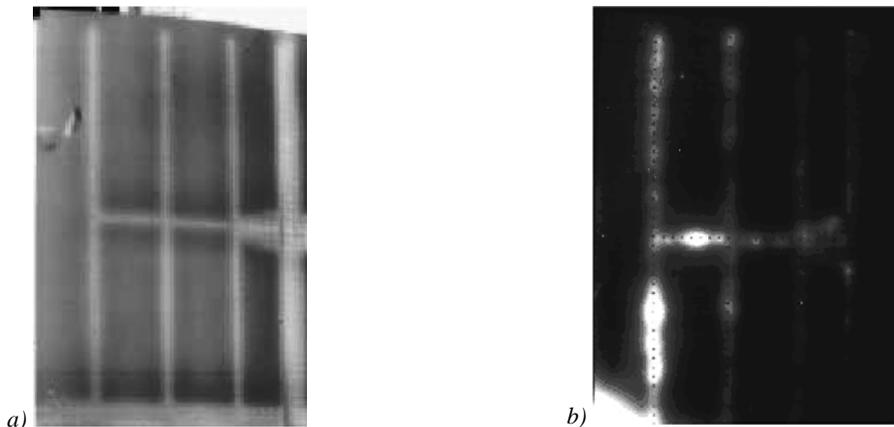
Riveted fuselage panel of A340: a) inspected with OLT, b) ULT [17]
